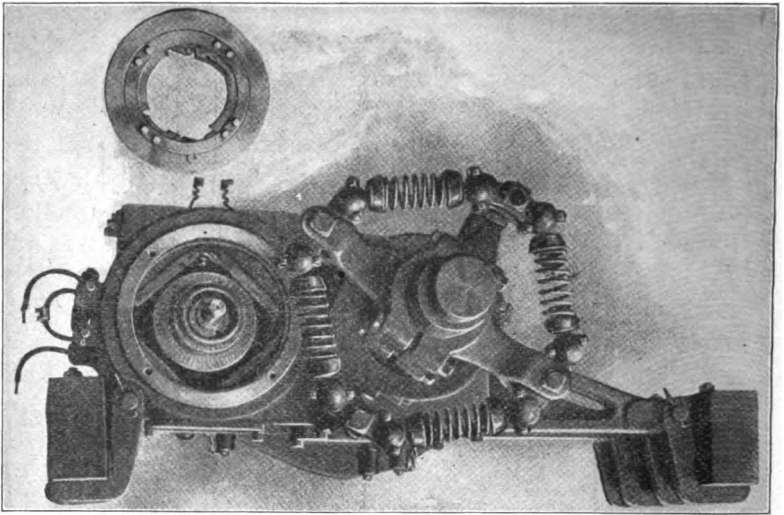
PLATE XXXVI.—SHOWING DRIVING SPRING AND GENERATOR SUSPENSION OF BLISS EQUIPMENT.
